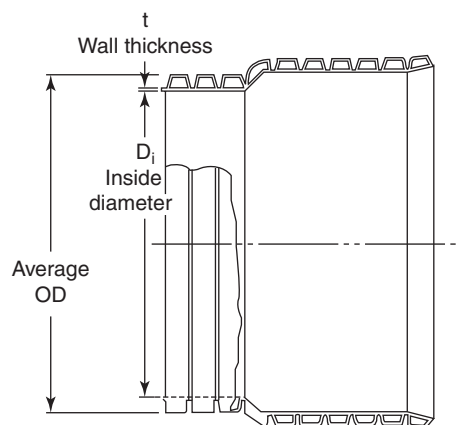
Dual wall corrugated profile wall PVC pipe
